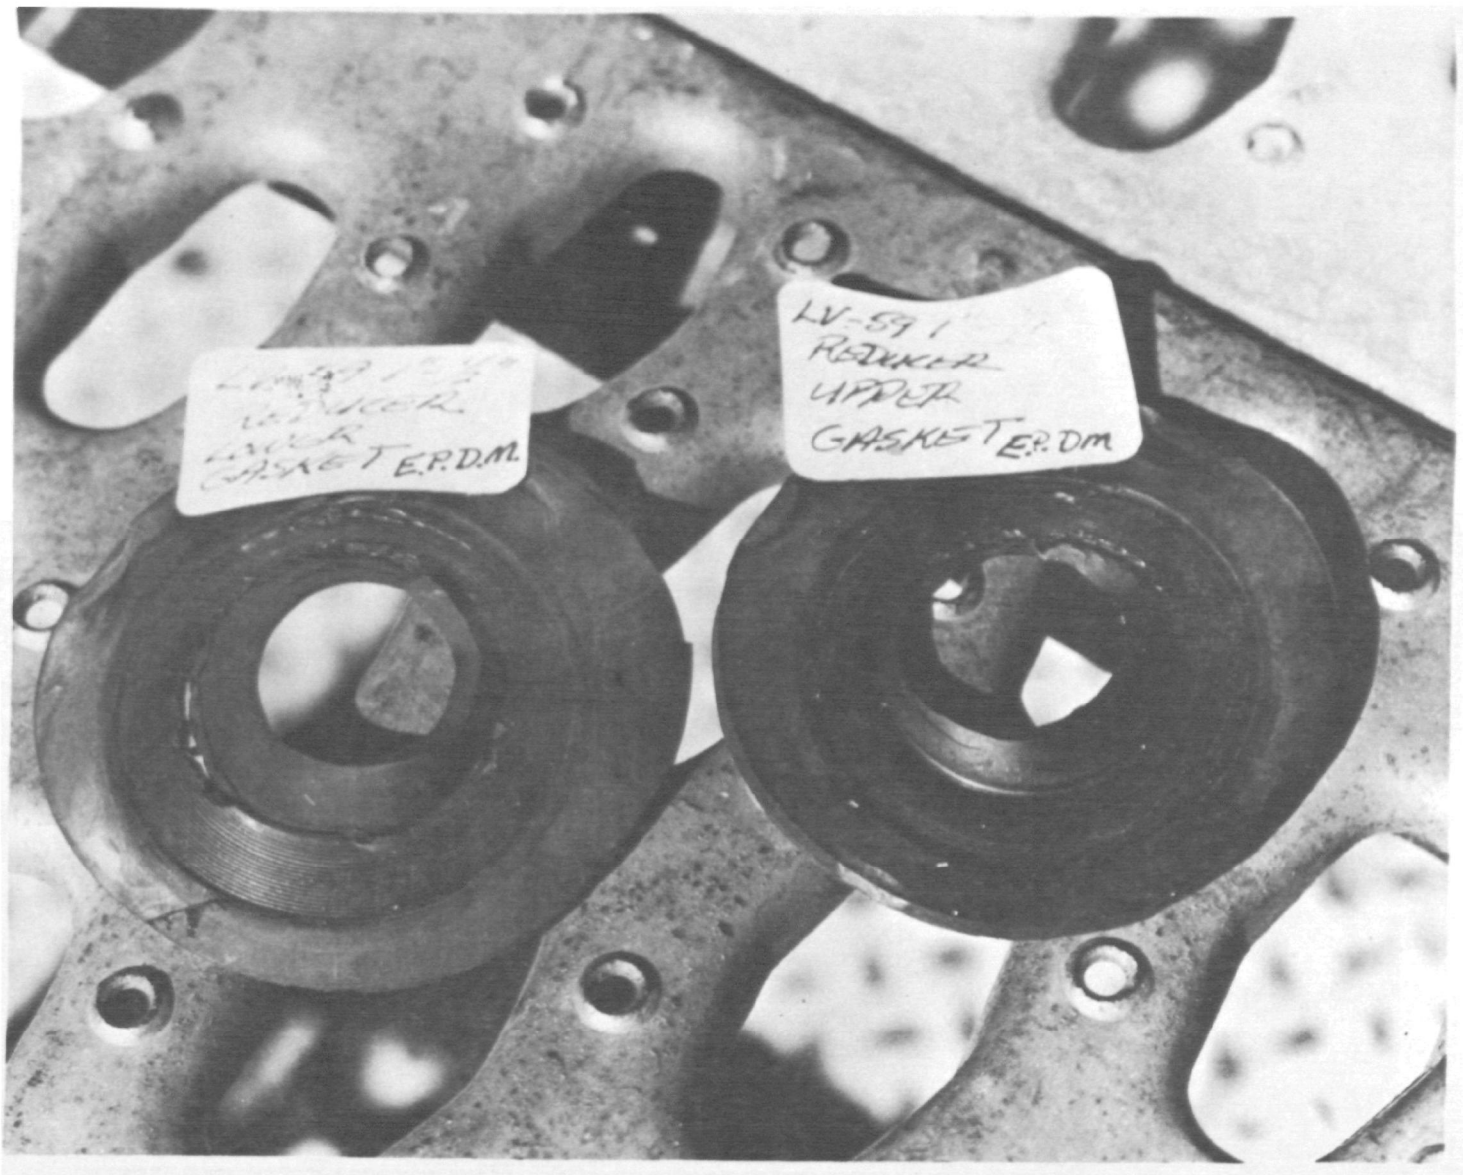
Flange Gaskets from Low Level Control Valve LV-59.
